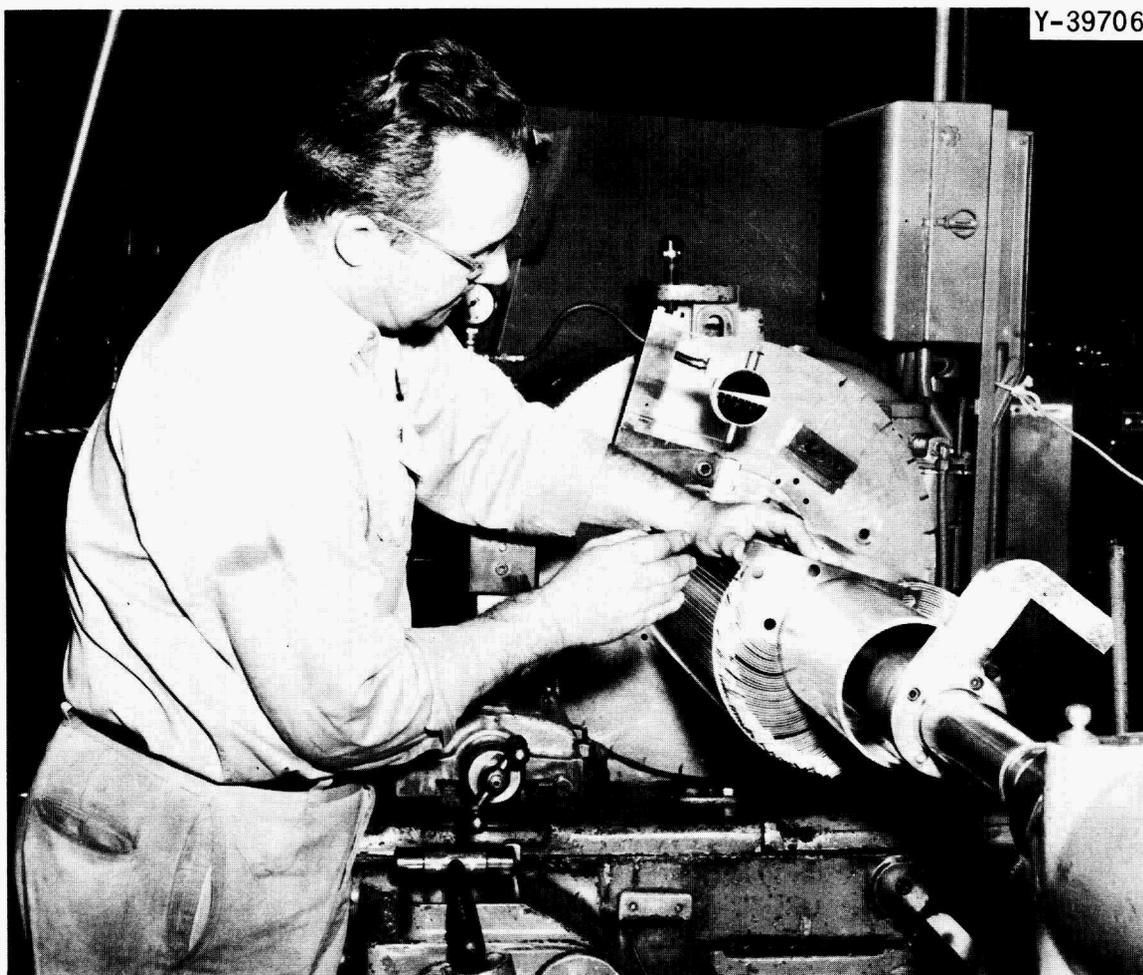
Inspection of the Contour of Fuel Plates During the Buildup of Fuel Arrays.
